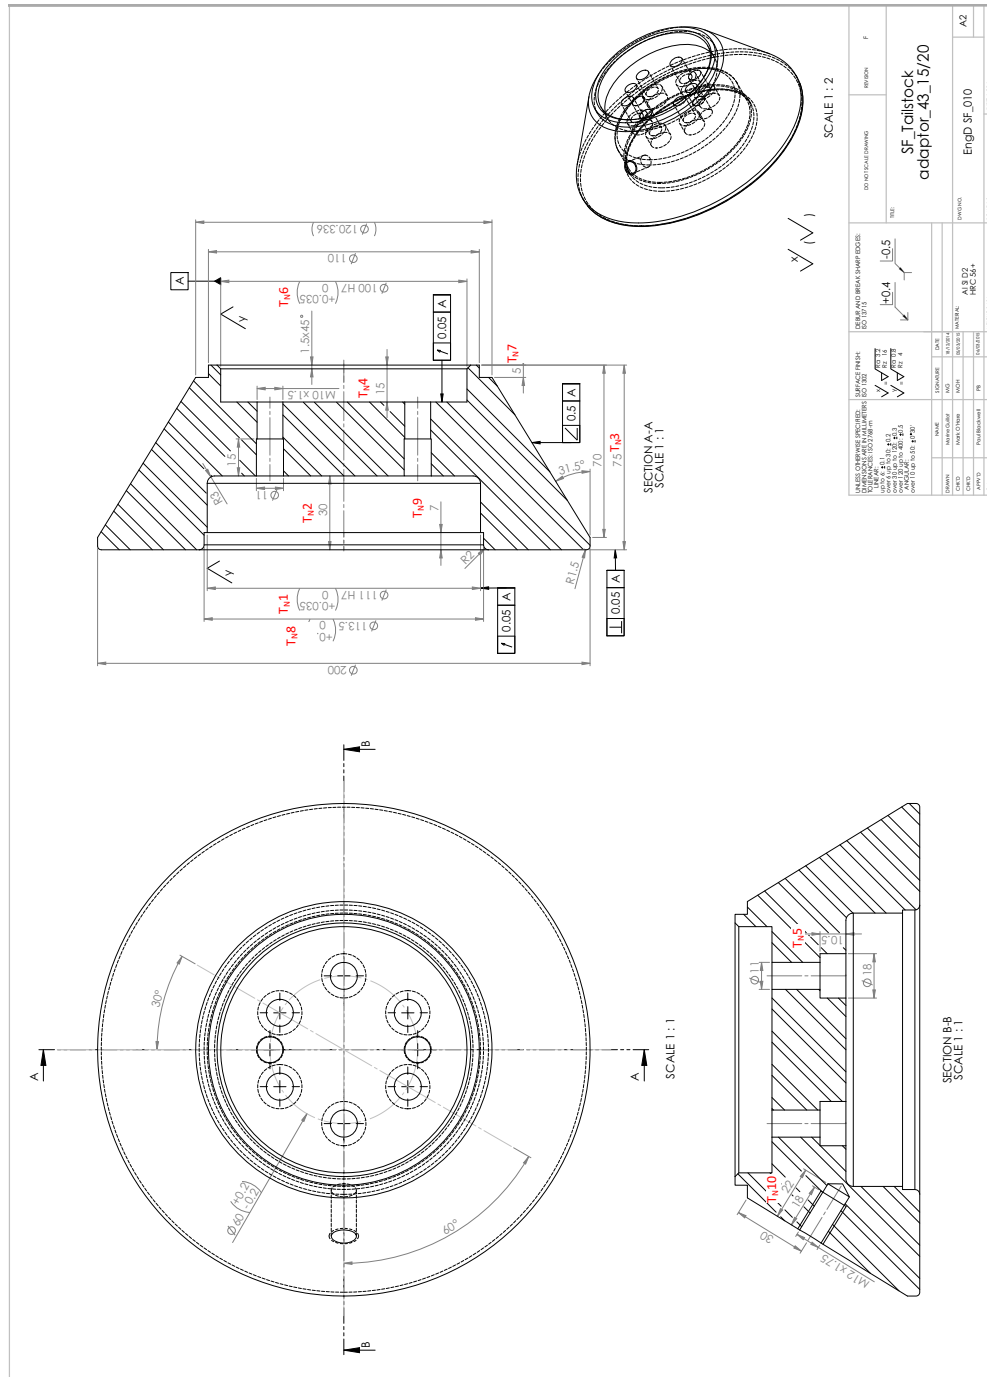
Drawing: Tailstock adaptor – 43°, for blanks up to 20 mm thick, EngD SF\_010, “SF\_Tailstock adaptor\_43\_15/20”.
